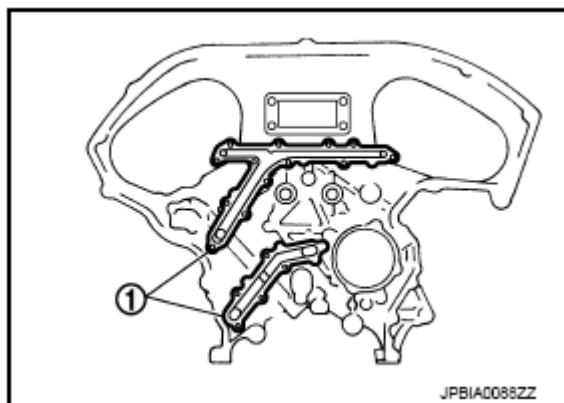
Identifying Plate Metal Cover Of Oil Passage
